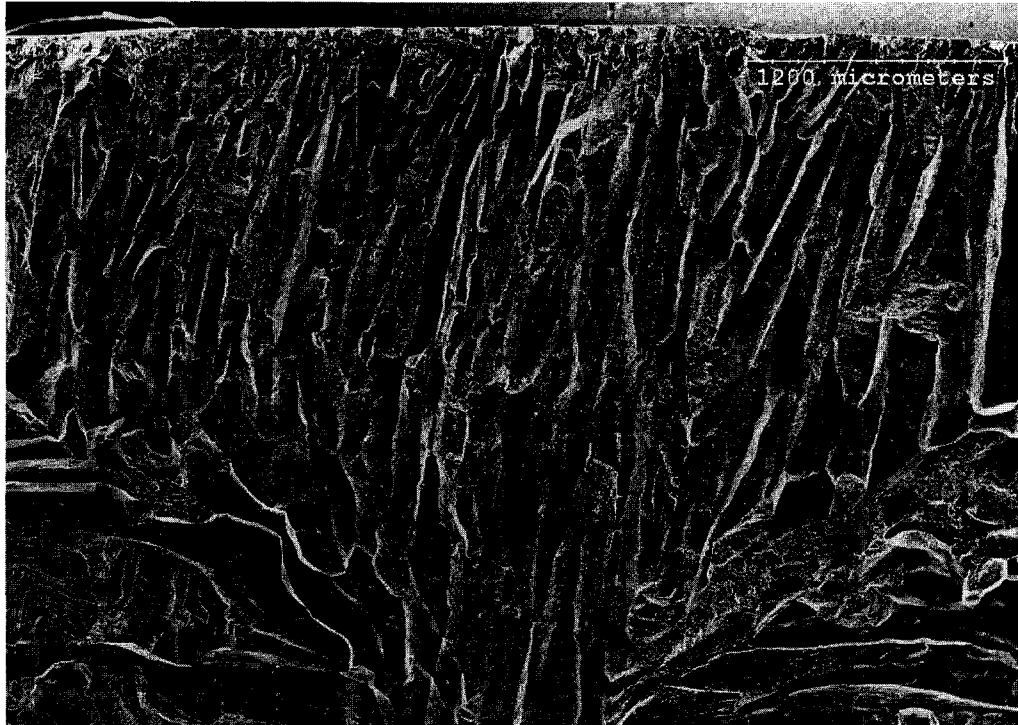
SEM Image of Alloy 6 Fracture Surface (4-hour cooled) (SE)
